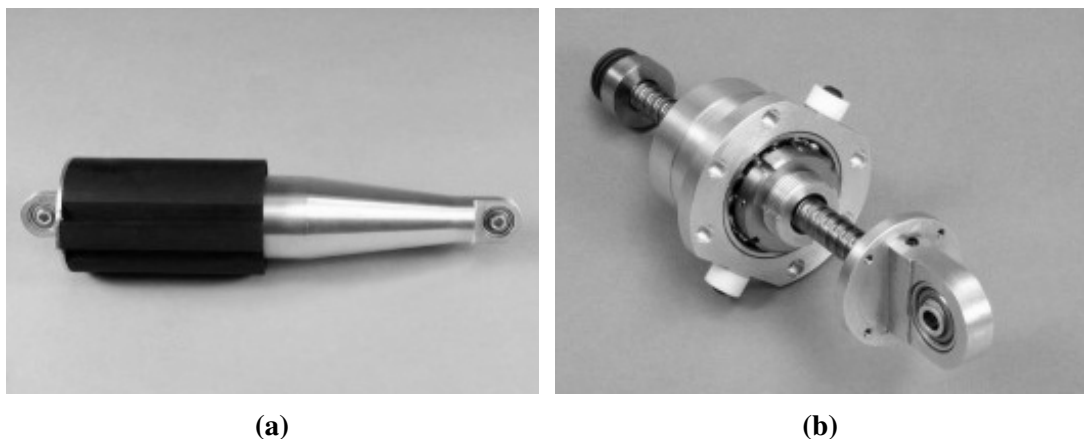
Ballscrew inerter made at Cambridge University ⁸, (a) with flywheel, (b) without flywheel
